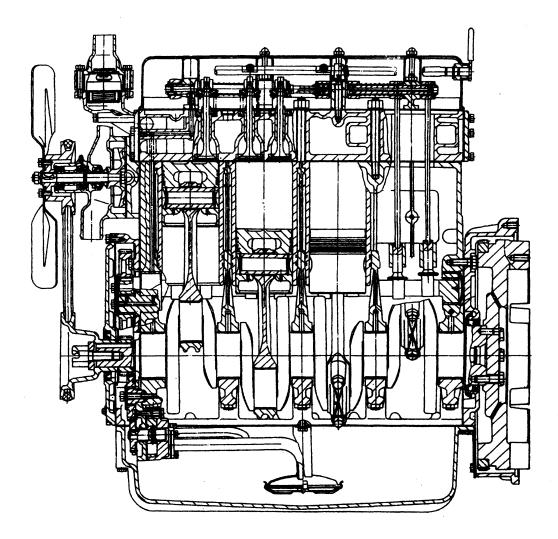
Longitudinal sectional drawing for 495 diesel engine
